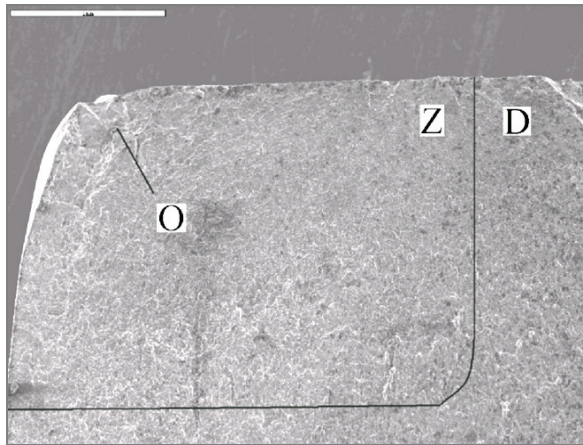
Sample G in Figure 10. The fragment of a fracture with fatigue zone – Z. Rapid fracture – D. As well as the places of fracture initiation – O. Zoom 35 \times , SEM
